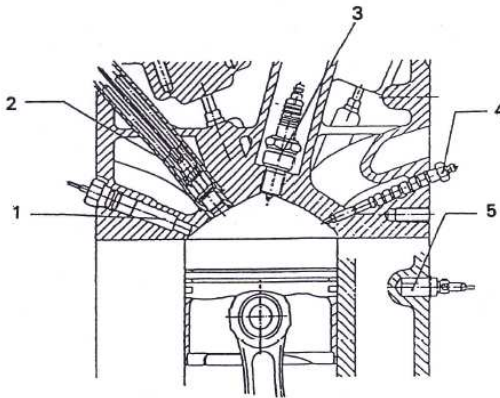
Examples of different ways of mounting pressure sensors in the combustion chamber (Kistler Inc. Service Instruction)
